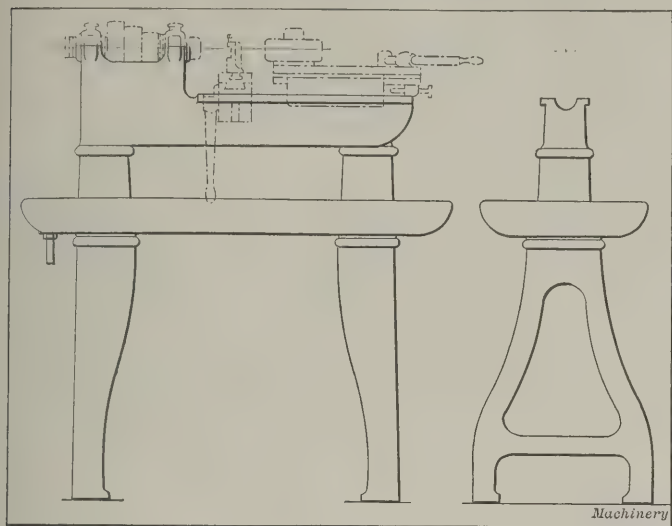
Turret Lathe Bed with Head cast Solid with it
